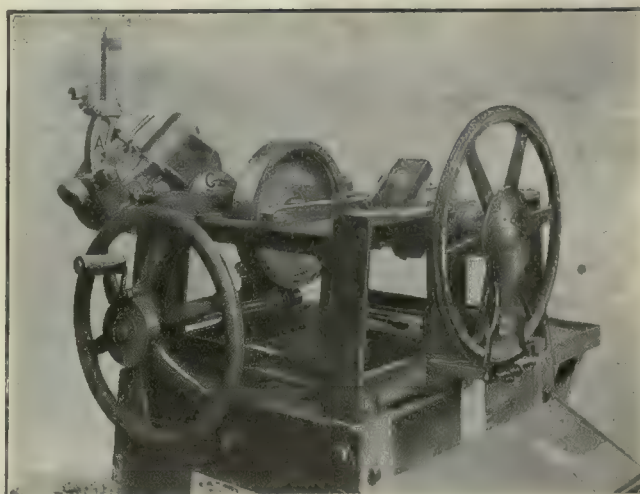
FIXTURE FOR THE FINAL INSPECTION OF THE RANGE FINDER
